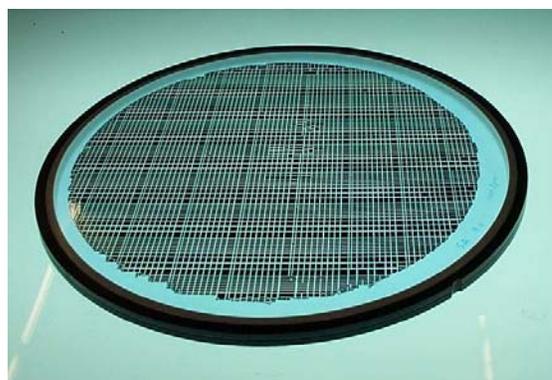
A completed 1-mil thick 6-inch wafer on UV-tape
